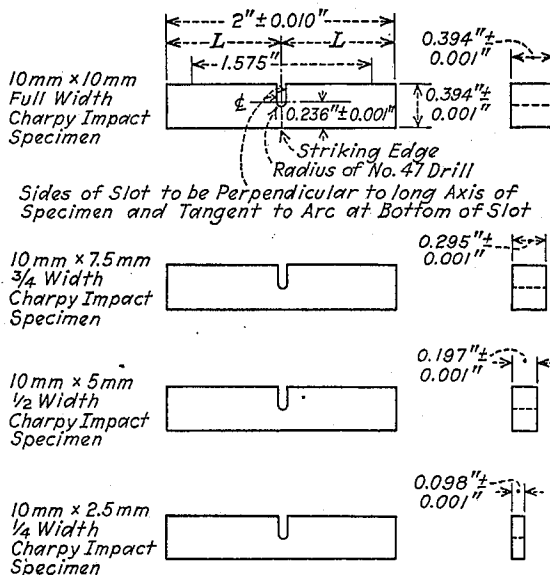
CHARPY IMPACT TEST SPECIMENS
